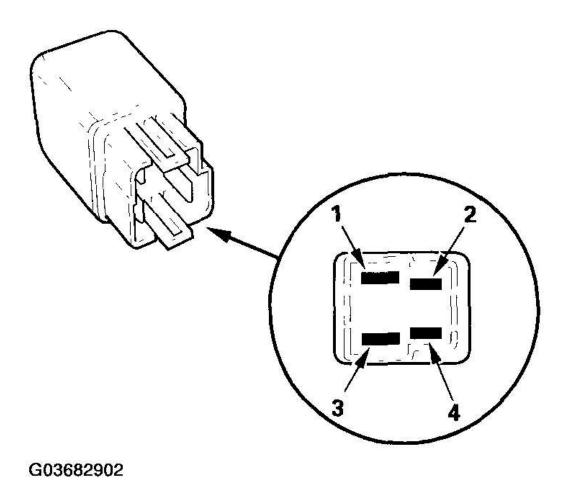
Identifying Blower Motor Relay, Type 1 Courtesy of AMERICAN HONDA MOTOR CO., INC.
